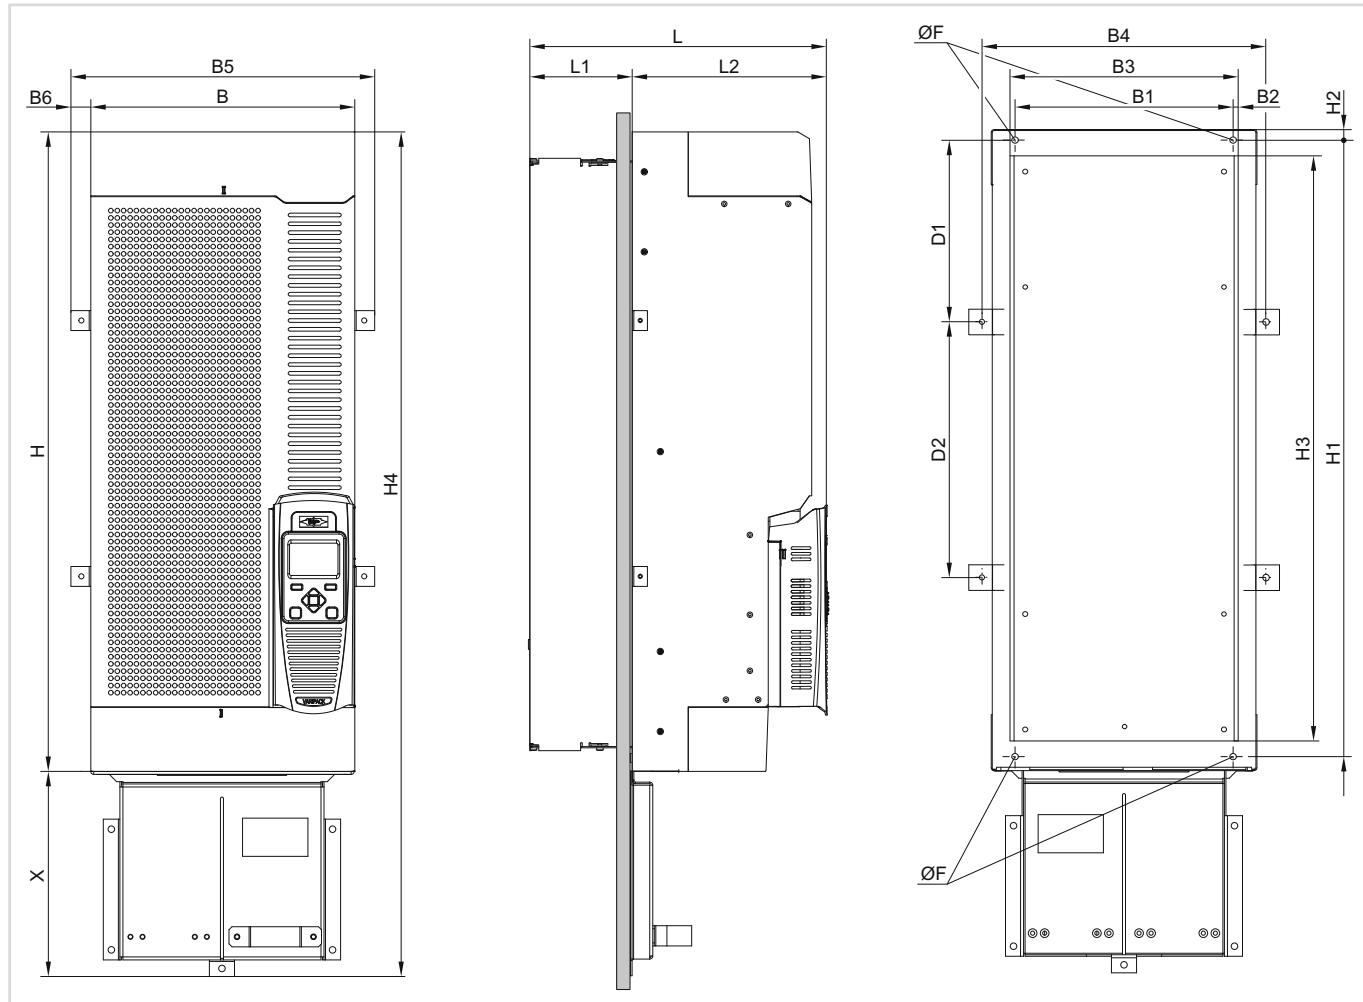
Dimensional drawing FJU+87 .. FKU+260 for through-switch cabinet mounting (with optional control panel)
